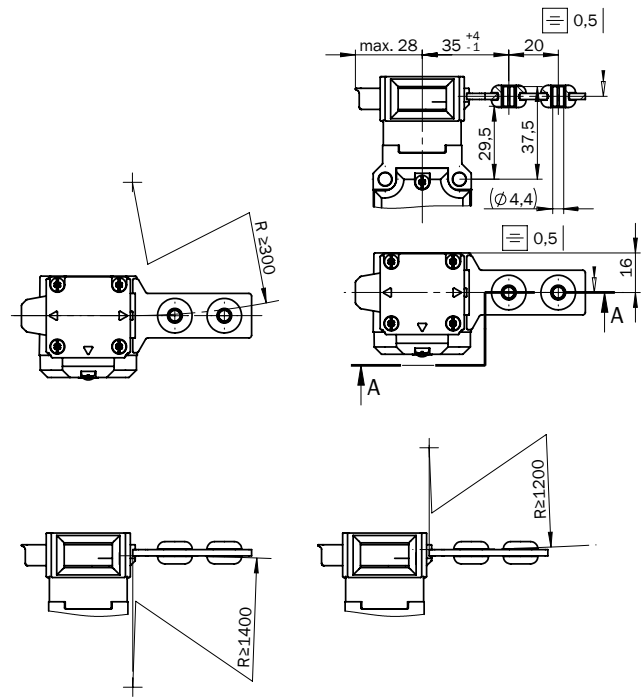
Min. door radii for TR110-XAS straight actuator (mm)
